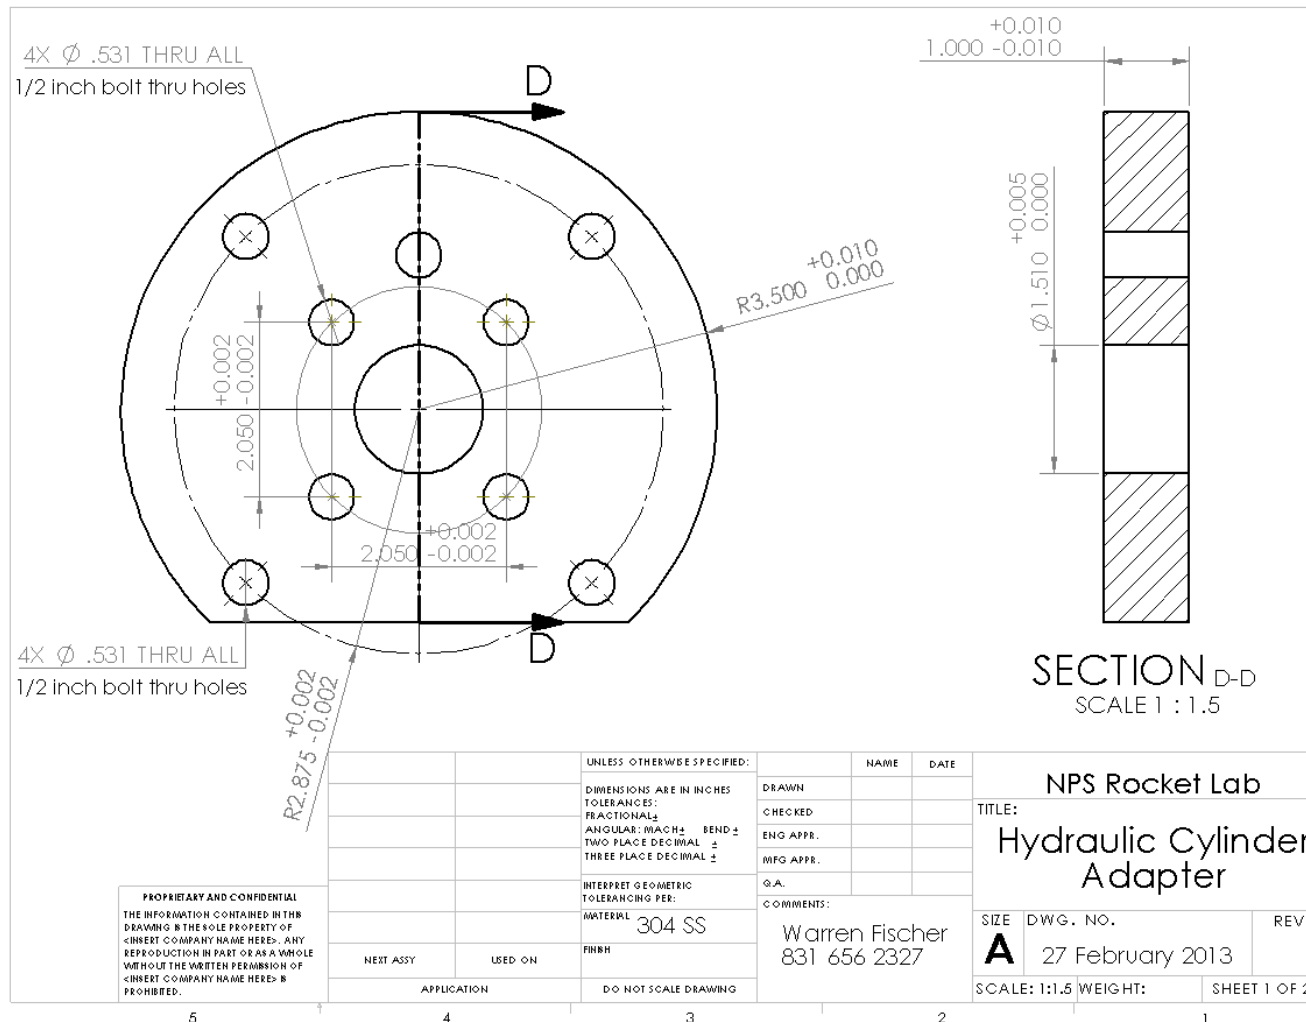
Fabrication Drawing for EMD Injector Adapter Hydraulic Cylinder Retaining Plate (View 1 of 2)
